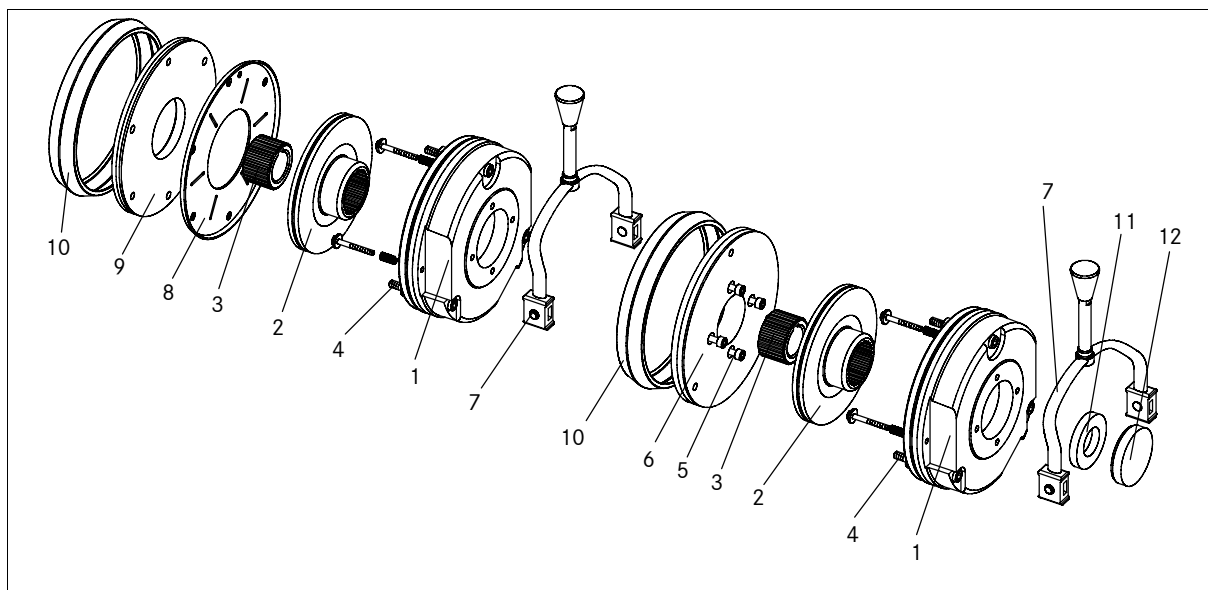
Double spring-operated brake INTORQ BFK458-06 to 25
